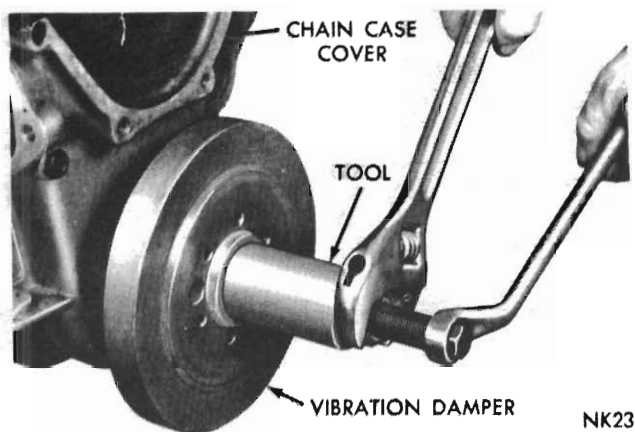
Installing vibration damper assembly (Using Tool E9C55C)
